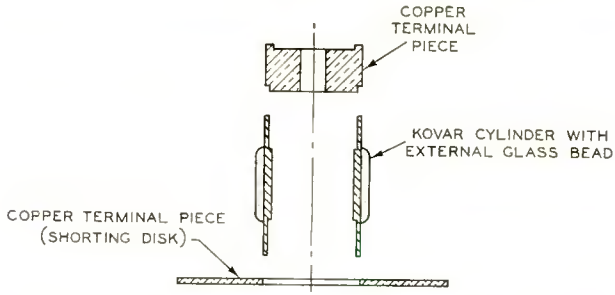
Kovar test-cylinder used for measurement of seal heating.
